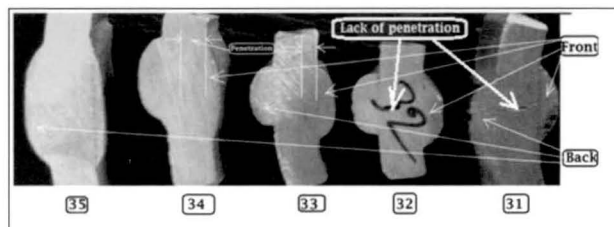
Penetration of weld-bead at welding speed 150 mm/min.
